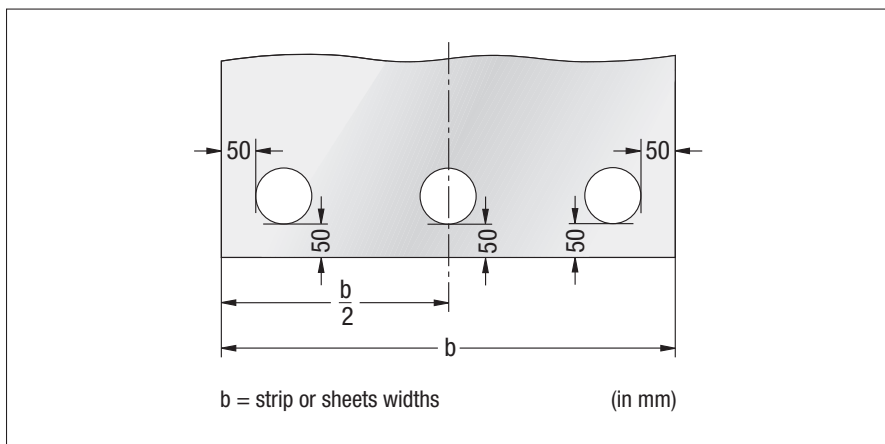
Position of the samples for testing the coating weight (triple-spot-test)
